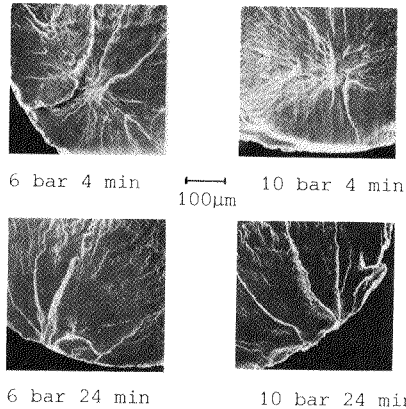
Fracture surfaces (SEM) of shot peened specimens (see Fig. 2)
